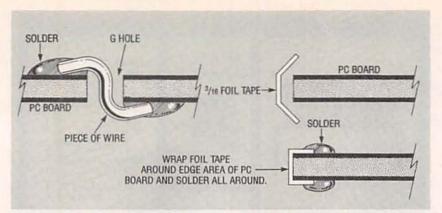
ALL HOLES MARKED "G" in Fig. 4 must have jumper wires passed through them that are soldered on both sides of the PC board as shown here. Also, both sides of the board must be grounded together with copper-foil tape as shown.
